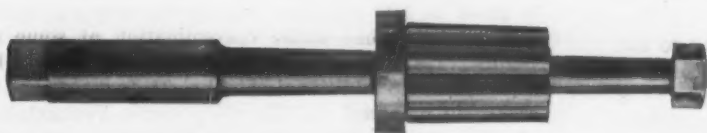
An Assembled View of the Nicholson Roller Tube Expander.
